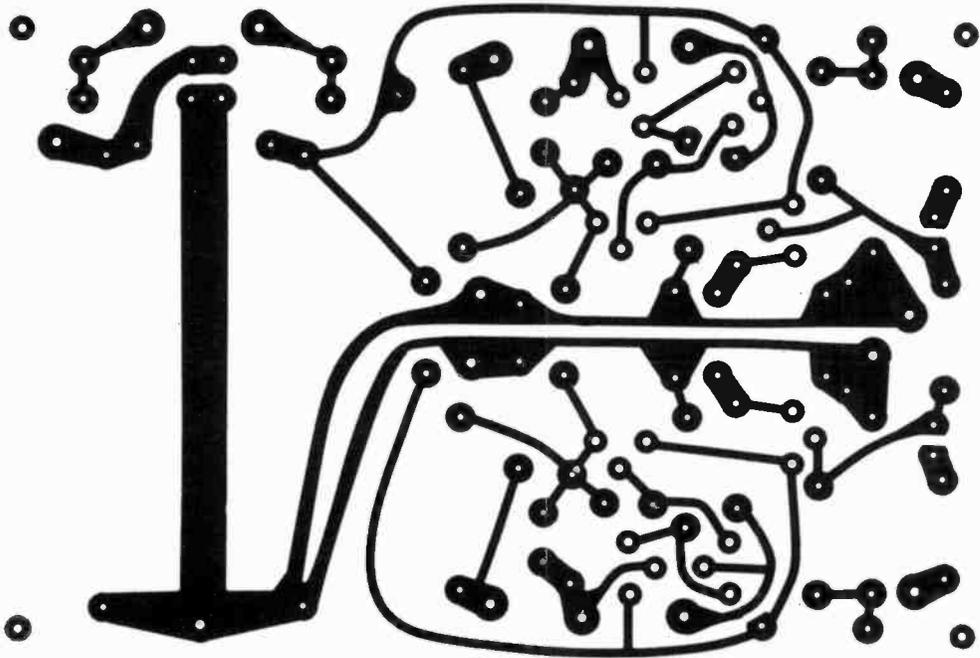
This actual size etching guide can be used to duplicate circuit board used in original prototype. Dots in corners locate board mounting holes.
